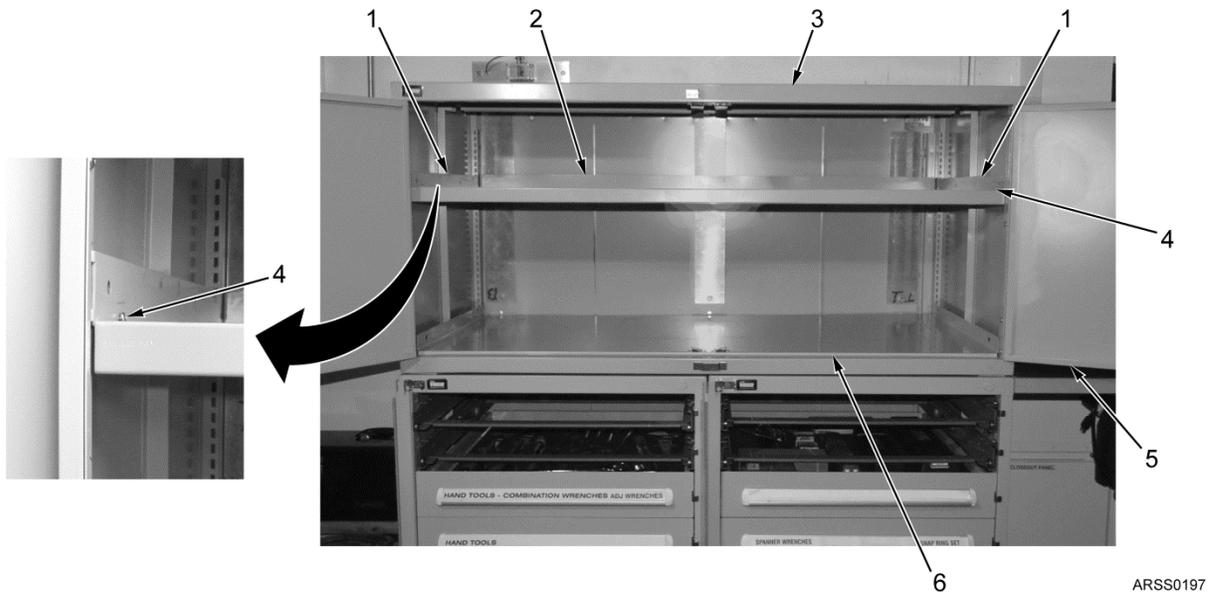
Tool Cabinet D Shelf and Pan Installation.
